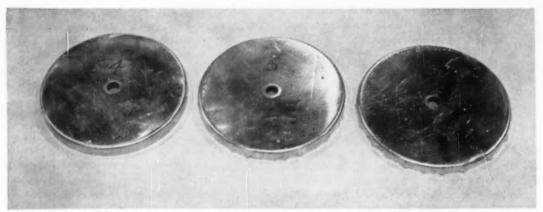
Sample parts of 2024-0 aluminum, 0,020 inch thick. Left to right: parts made in the explosive forming press with a 99-grain charge, the drop hammer and a large rubber forming press.
